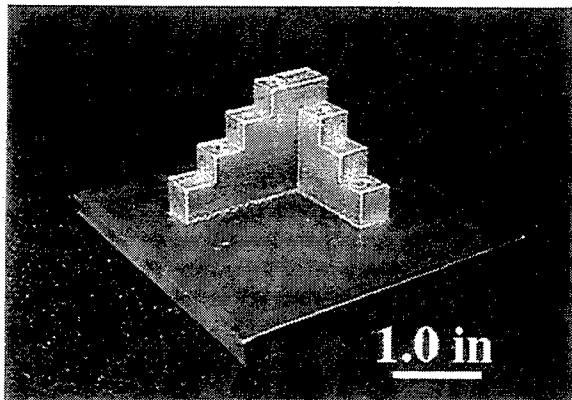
Accuracy test part with step geometry and cylindrical holes.
